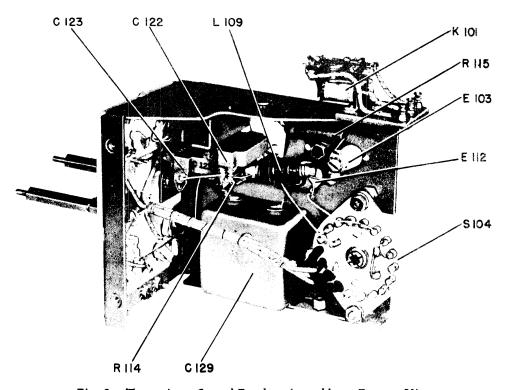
Transmitter Crystal-Bracket Assembly — Bottom View
